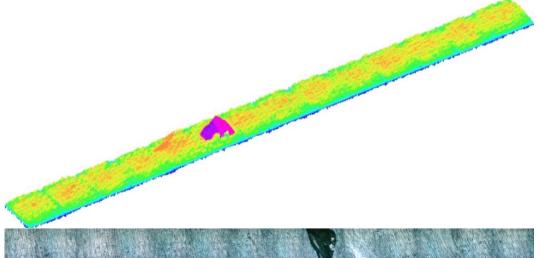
The 2D and 3D images of the surfaces machined with the high-speed milling cutter (the fourth mode).
